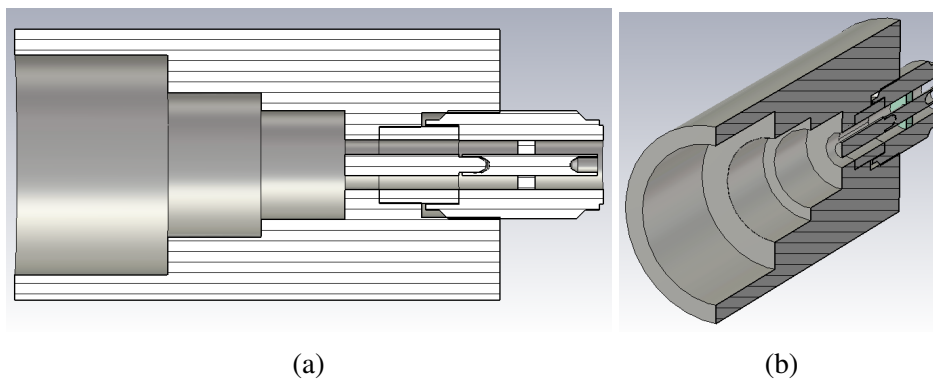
Two ports test fixture (2PTF): (a) cut view, (b) 3D cut view.
